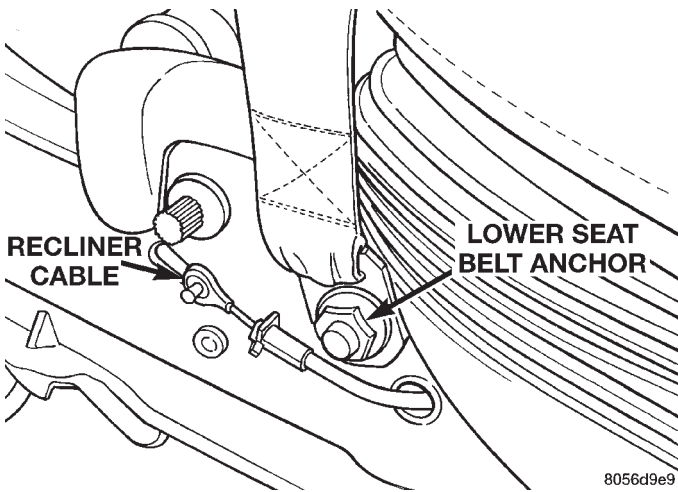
Lower Seat Belt Anchor And Recliner Cable
